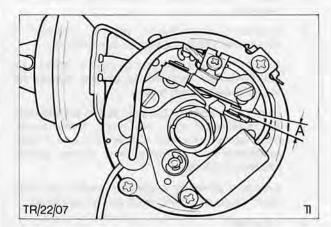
Alternative method of adjusting dwell by checking contact breaker points gap A – Points gap
